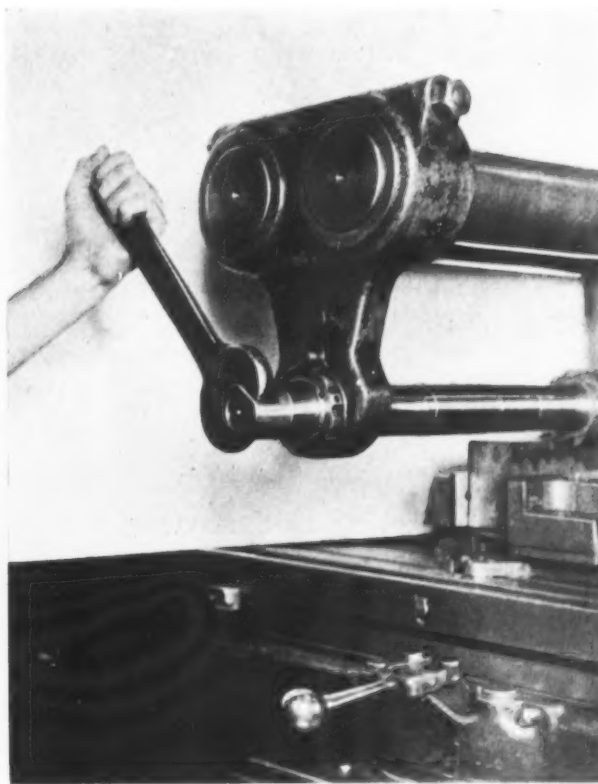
The Arbor Yoke Should be in Place Whenever a Wrench is Used to Tighten or Loosen Nut
